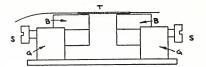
JIG FOR CONCENTRIC TUBE THERMOCOUPLE ASSEMBLY
